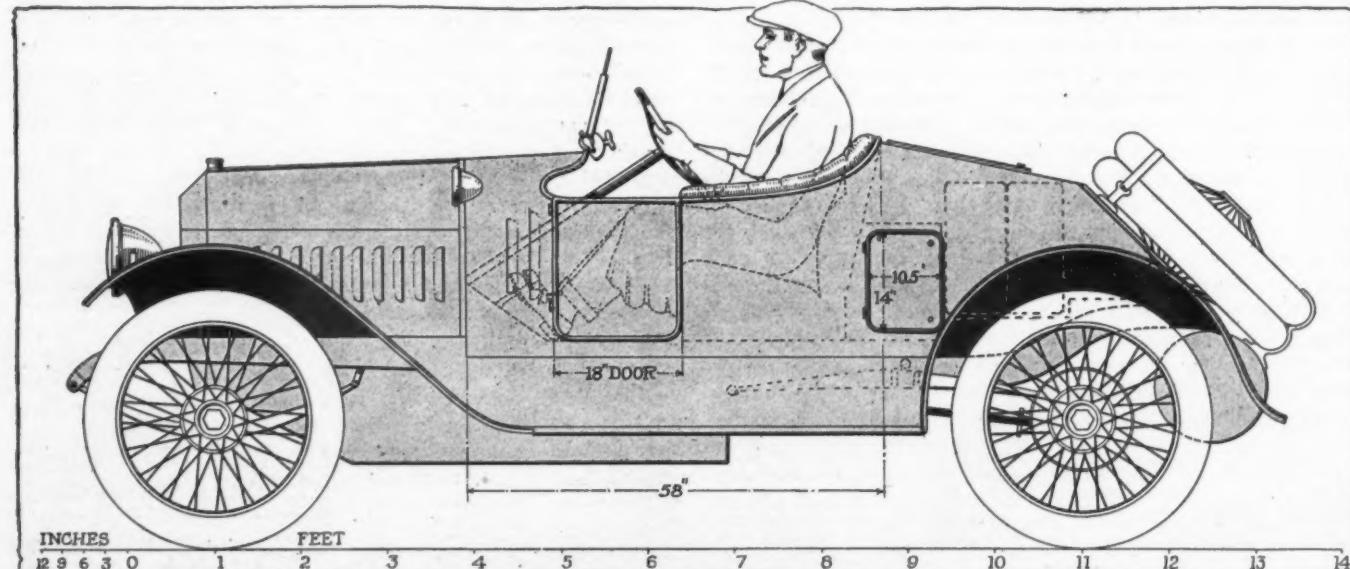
Side elevation to scale of suggested runabout design adapted to chassis of Edwards-Knight 25
